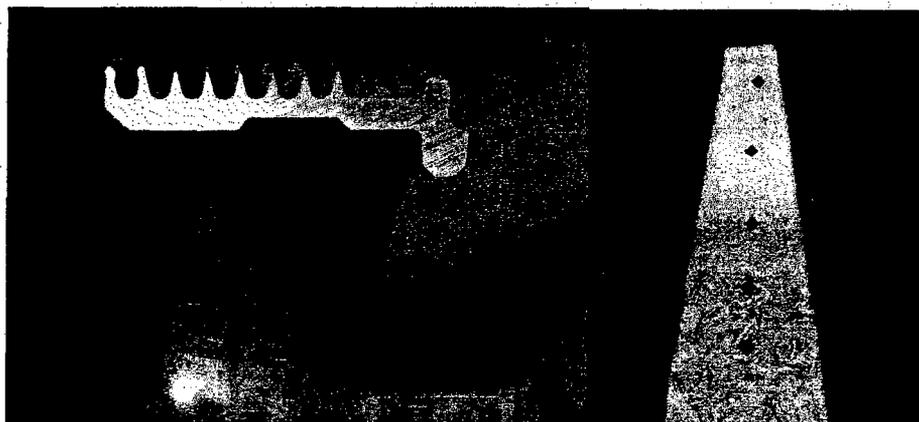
Example of seal teeth repair by laser welding (Courtesy of Standard Aero Ltd., Winnipeg, Manitoba).
